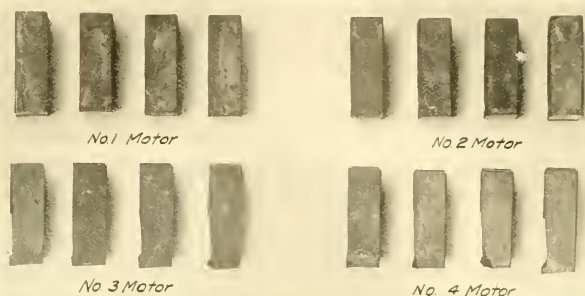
SIDE VIEW OF CARBON BRUSHES
